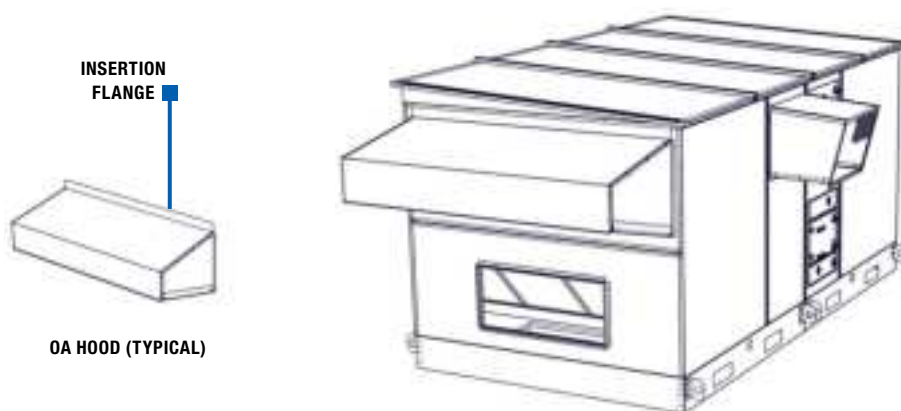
OUTSIDE AIR HOOD (TYPICAL)
